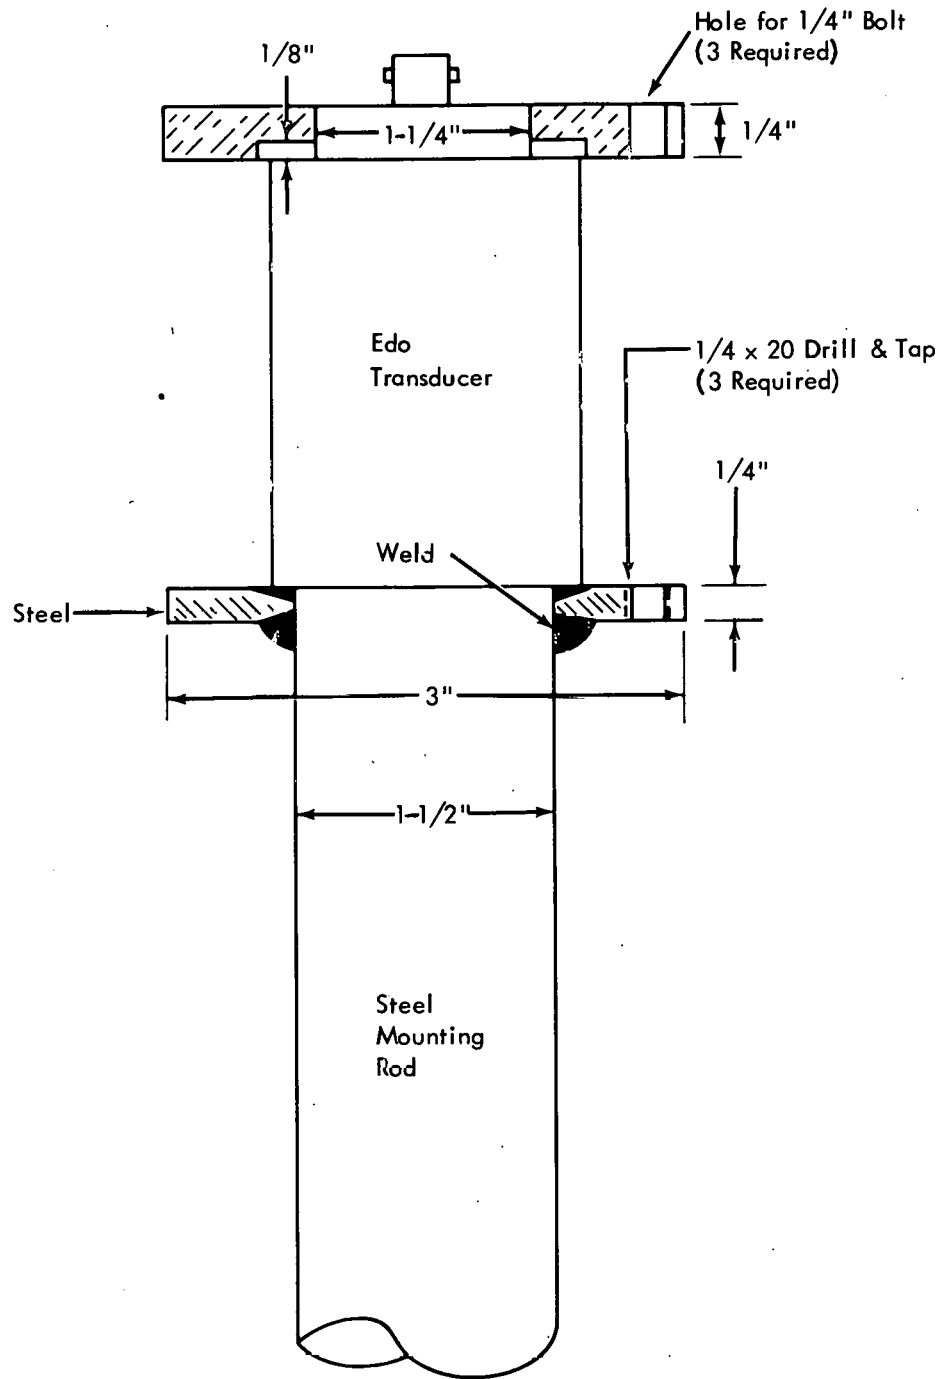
MOUNTING FIXTURE FOR EDO ACOUSTIC TRANSDUCERS
